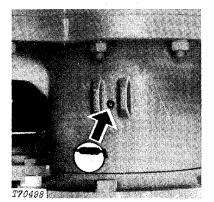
Right Feed Roll Final Drive Main Housing Pivot (1 Point)
